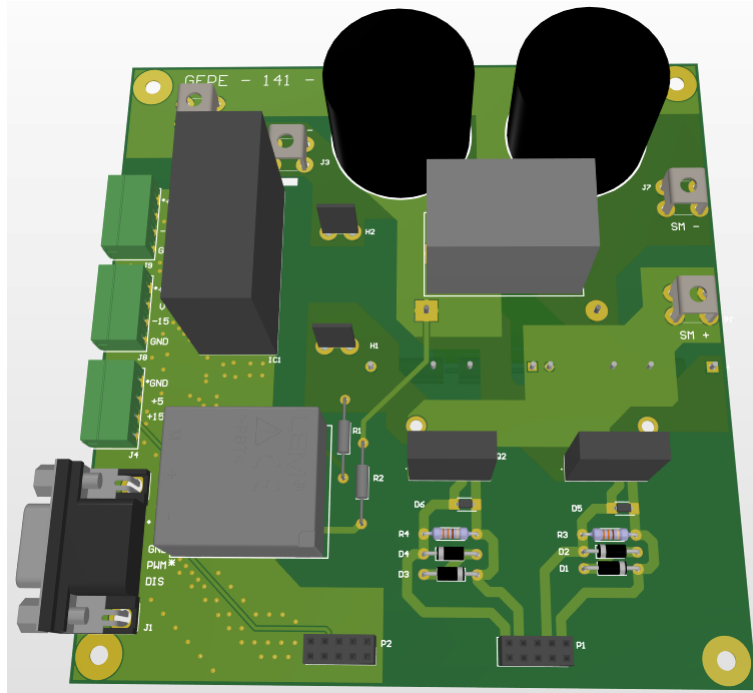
3D view in Altium Library of submodule PCB with components.
